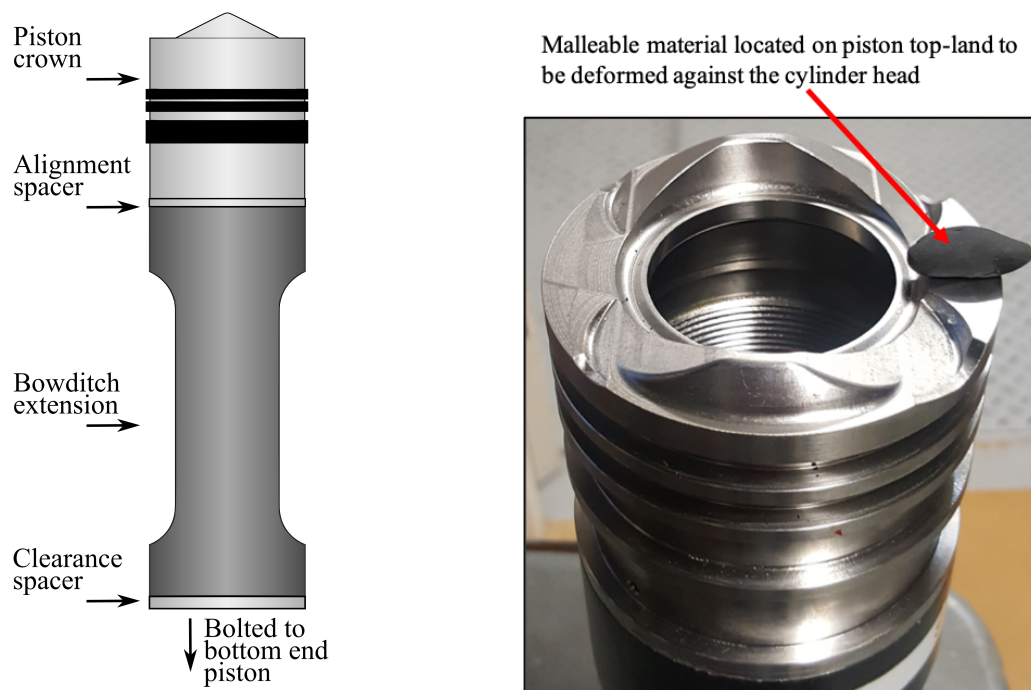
A schematic of the Bowditch piston assembly with the required spacers for the shaped pistons (left) and a photograph showing the method used for measuring the clearance between the cylinder head and the piston (right).
